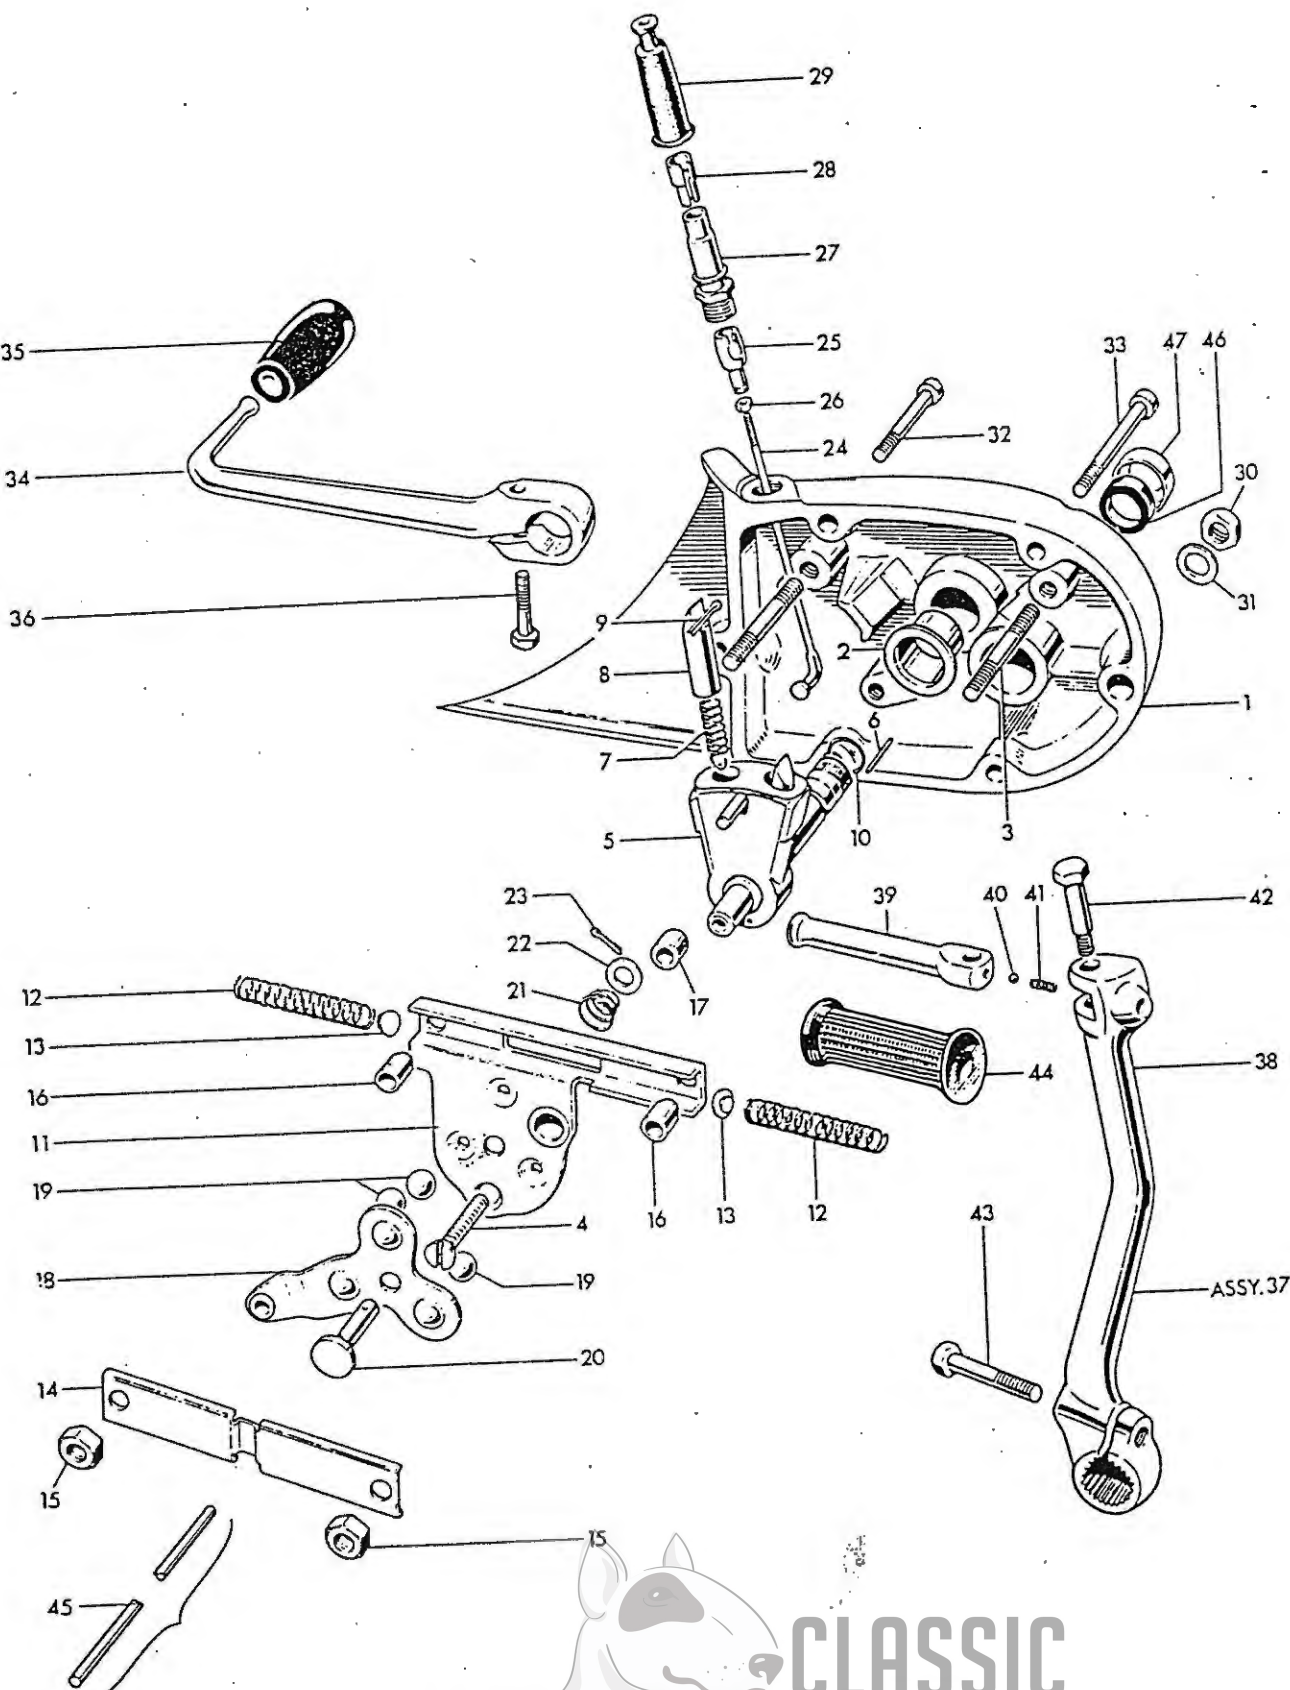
GEARBOX OUTER COVER AND LEVERS
